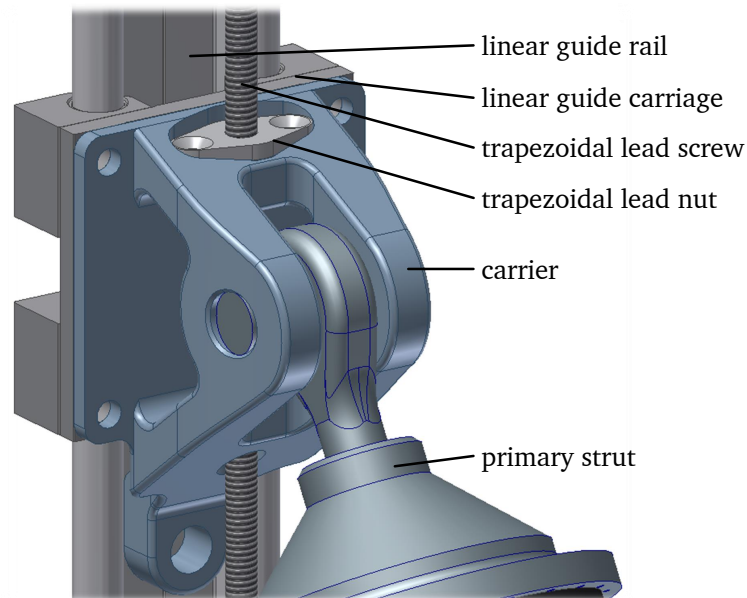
CAD model of carrier connecting IF1, linear guide, and lead nut
